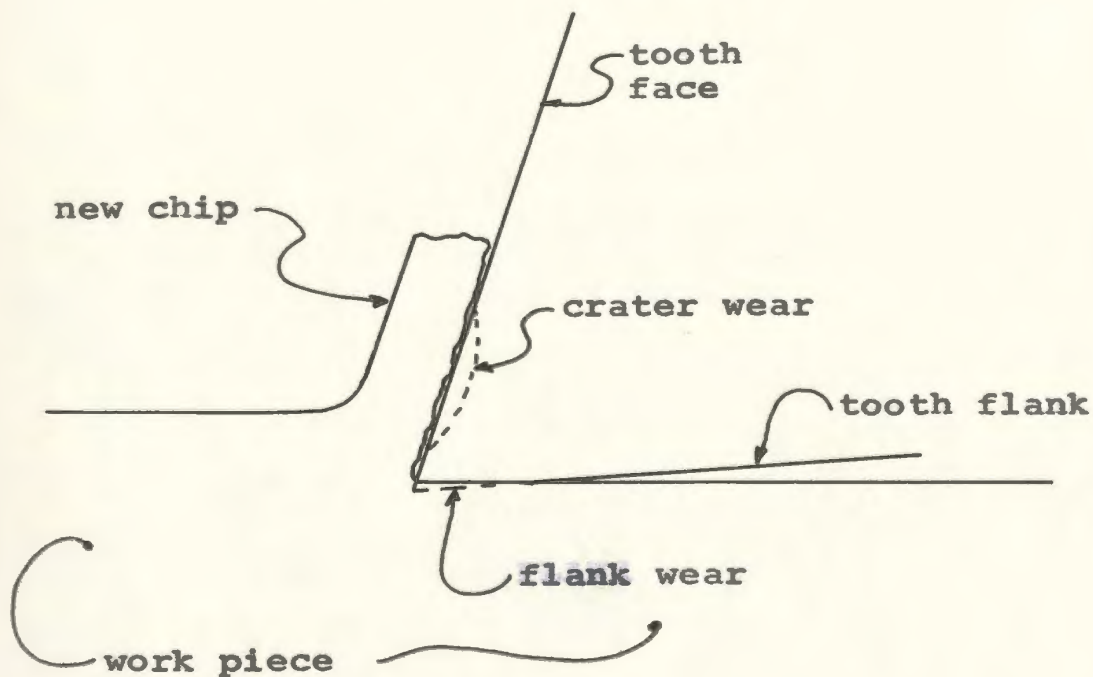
ILLUSTRATION OF TYPICAL TOOL WEAR
